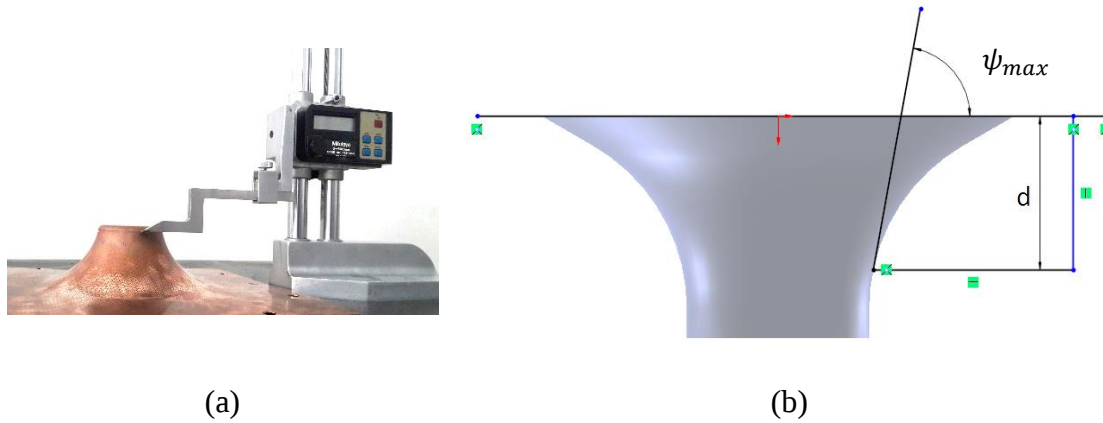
Methodology to calculate maximum forming angle, a) fracture depth measurement using height calibre, b) relating fracture depth to the maximum forming angle using SOLIDWORKS®
